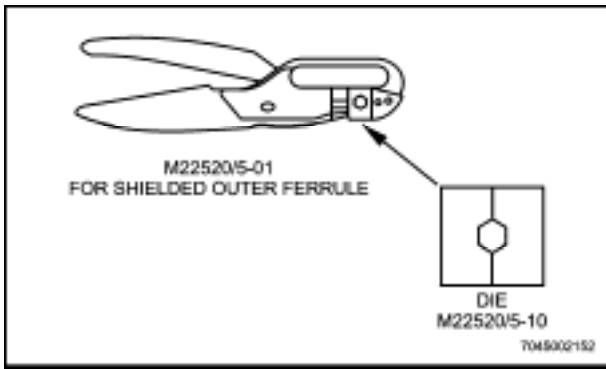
Crimping Tool for Shielded Outer Ferrule
